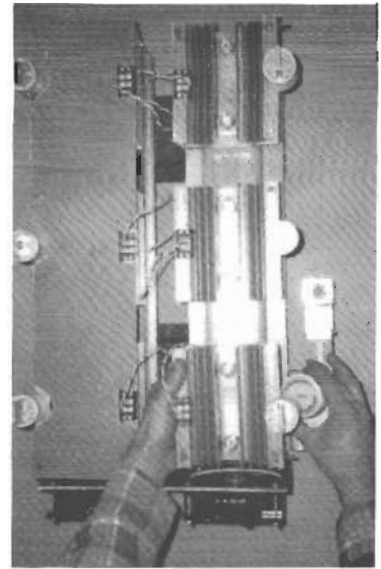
shows the clamping bolts being retightened: It is important that the bolts be tightened alternately. We suggest that the following sequence be followed:
